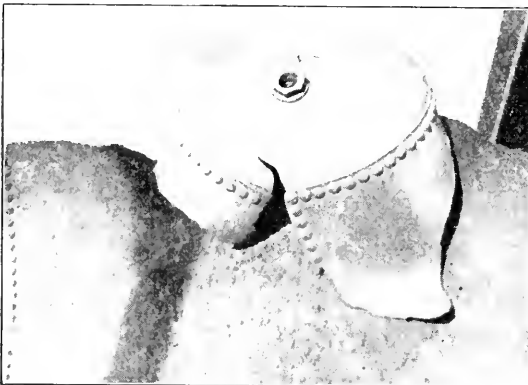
A CLOSER VIEW OF THE TANK HEAD.
